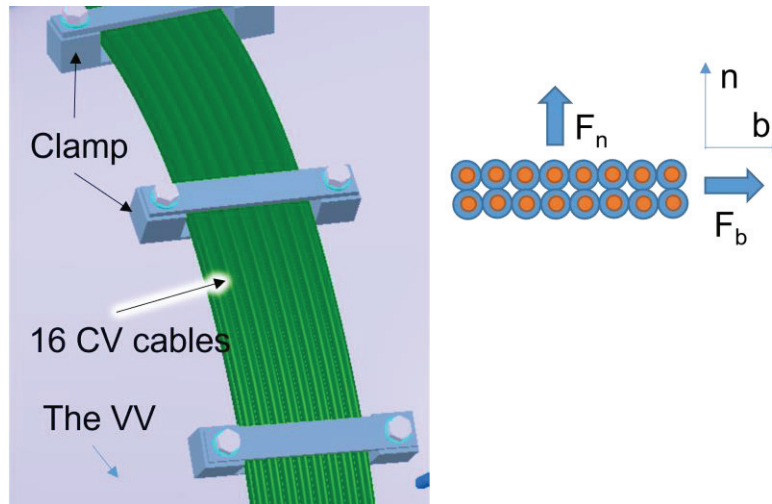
Concept to fix the TFC. The TFC will be manufactured by winding CV cable with insulator on the vacuum vessel. The cables will be clamped to the vacuum vessel with appropriate intervals to suppress the displacement due to the electromagnetic force. The clamp pitch for keeping the displacement of the conductor below the proper value will be determined.
